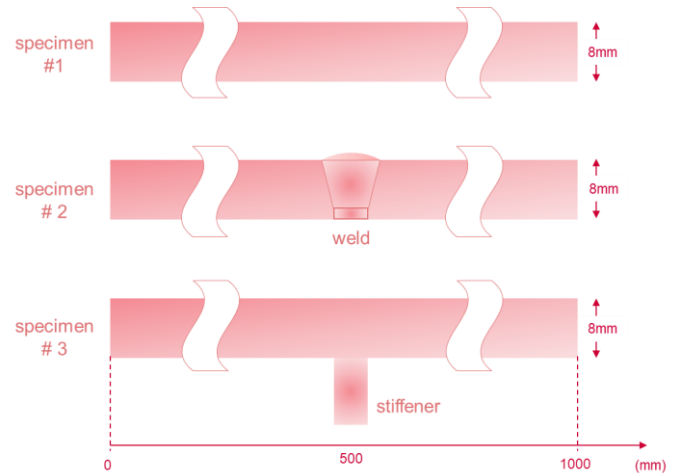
2-D modeling of the plate representing the realized mock-up. Specimen #1: the plate without obstacle – specimen #2: the plate with weld obstacle #3: the plate with stiffener obstacle.
